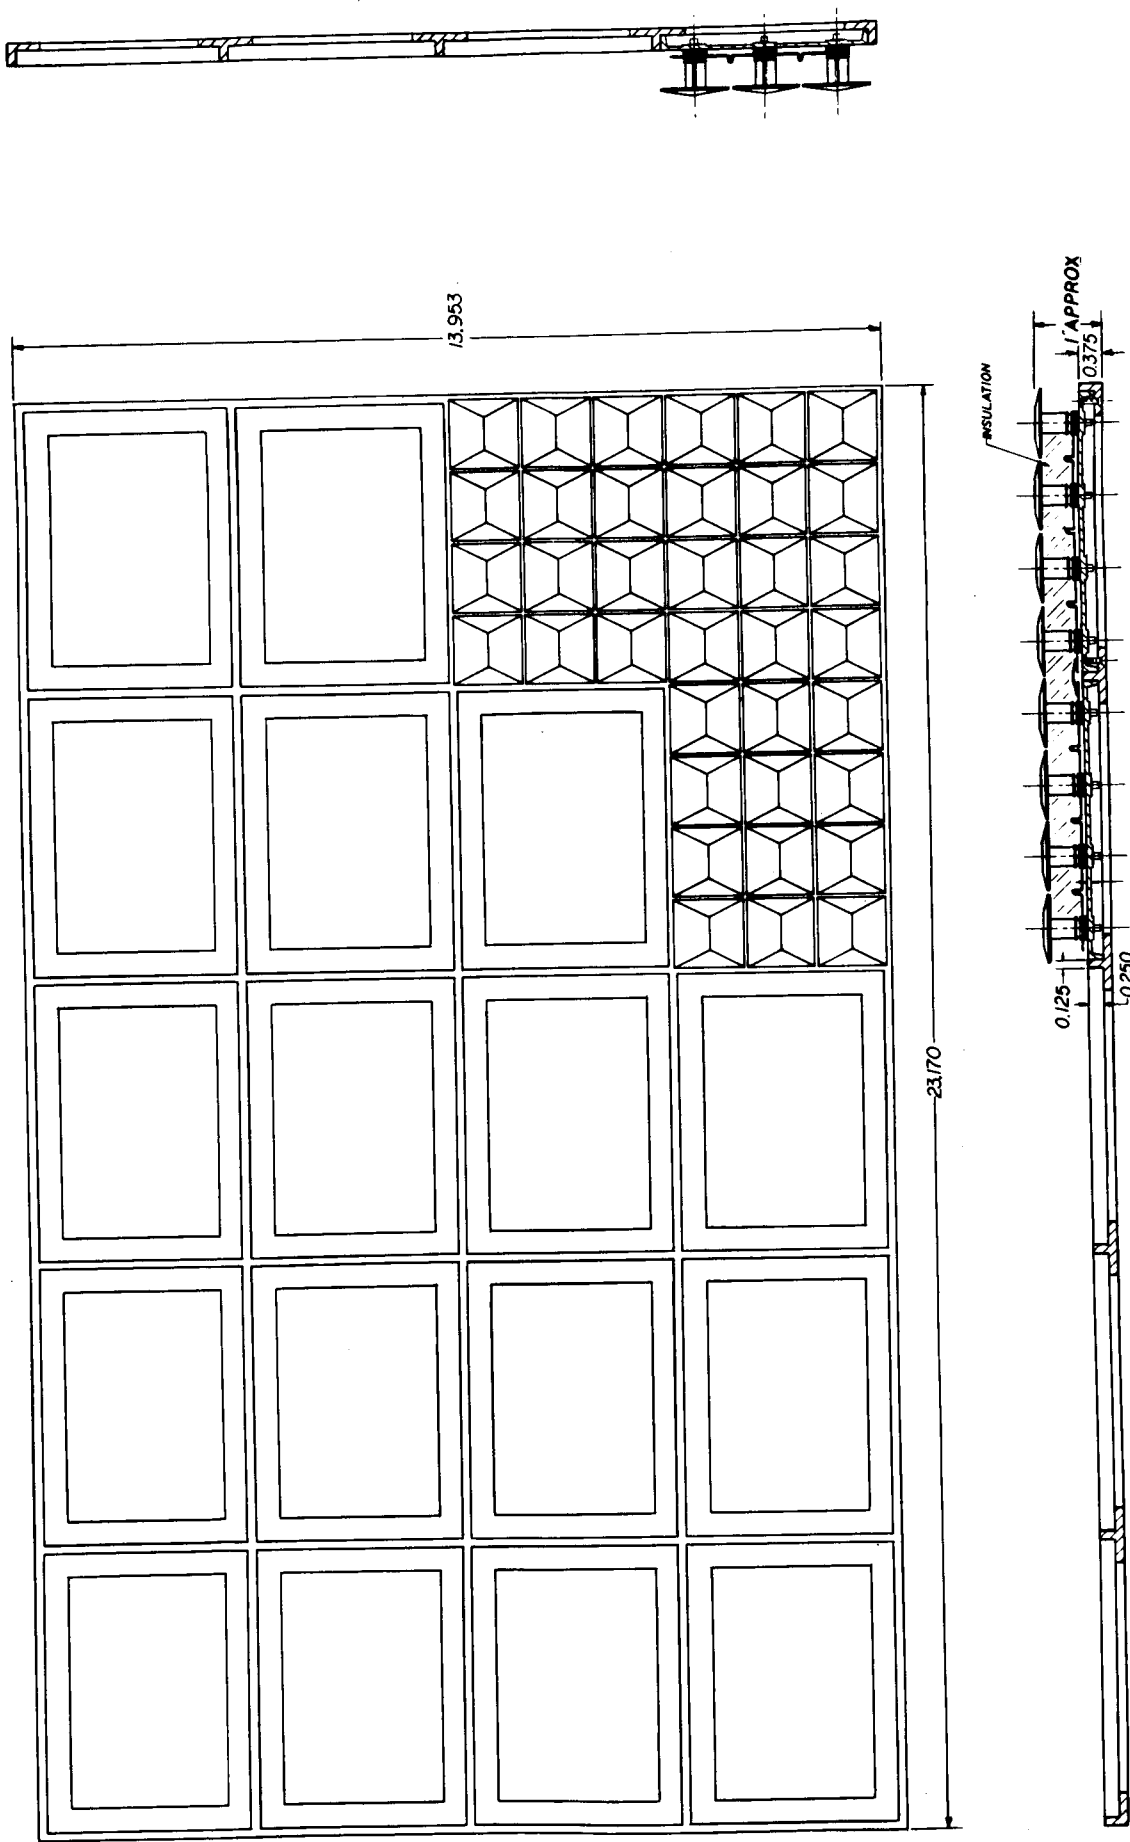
REFERENCE DESIGN—GENERATOR PANEL ASSEMBLY
